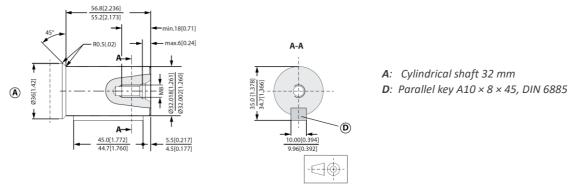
OMH shaft version: Cylindrical shaft 32 mm; Parallel key A10 \times 8 \times 45, DIN 6885
